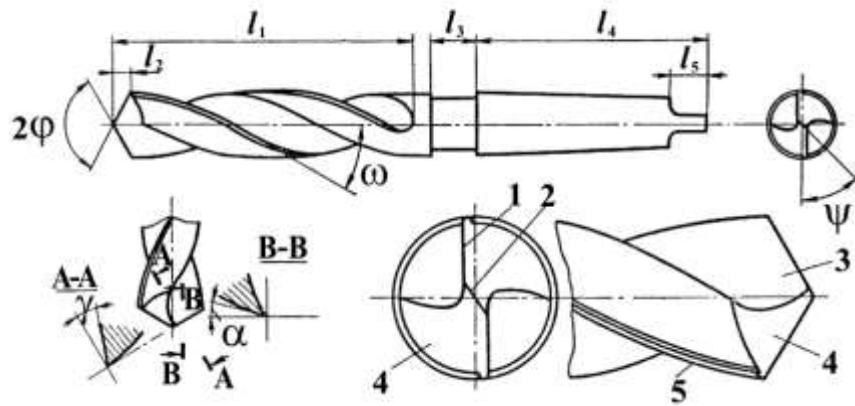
Parts and elements of twist drill:  $l_1$  - body;  $l_2$  - lip;  $l_3$  - neck;  $l_4$  - shank;  $l_5$  - tang; 1 - main cutting edge; 2 - cross cutting edge; 3 - top rake; 4 - back rake
